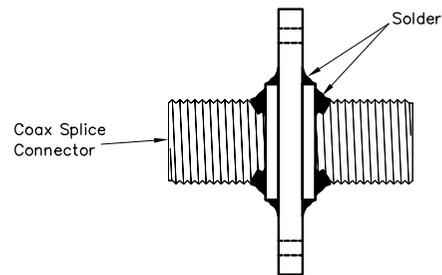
Feedthrough connector for coax line. An Amphenol 83-1J (PL-258) connector, the type used to splice sections of coax line together, is soldered into a hole cut in a brass mounting flange. An Amphenol bulkhead adapter 83-1F may be used instead.
